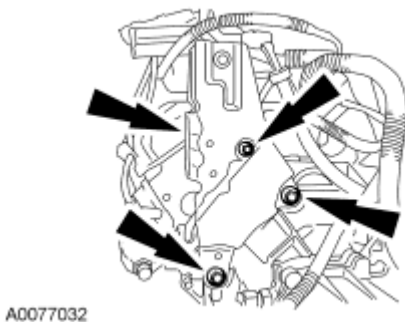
Locating Engine Roll Restrictor Bracket Bolts
